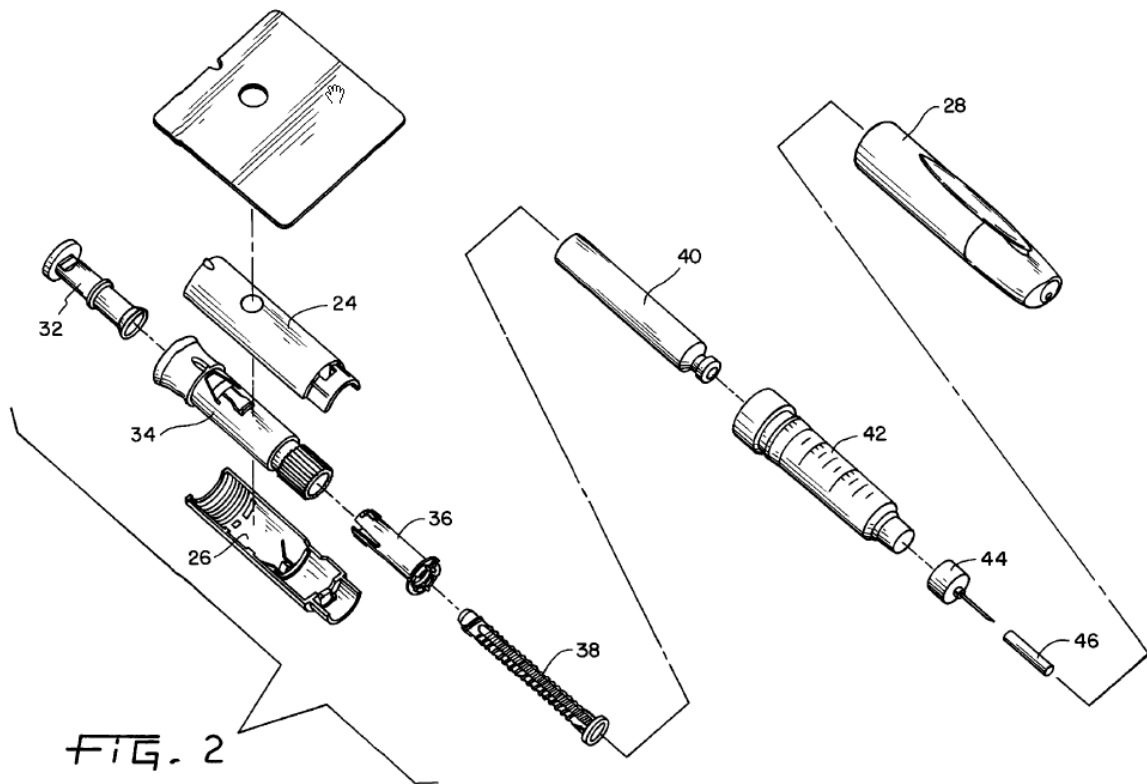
, reproduced above, shows an exploded view of injection medication device 20. *Id.* at 6:42–43, 7:15–16. Medication device 20 includes mechanism housing 22 made from housing parts 24 and 26, button 32, dial mechanism 34, nut 36, and leadscrew 38 that forms a drive stem. *Id.* at 7:17–18, 7:32–34, 9:12–13.
